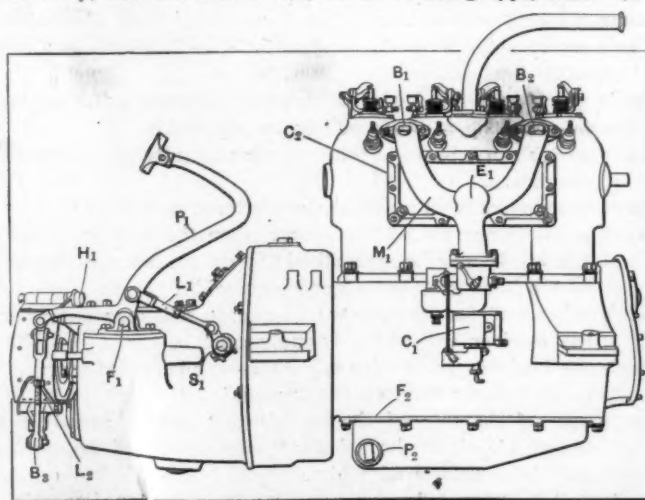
Right-hand side of the Model "30" motor, showing the Mayer type of carburetor on a special form of manifold
